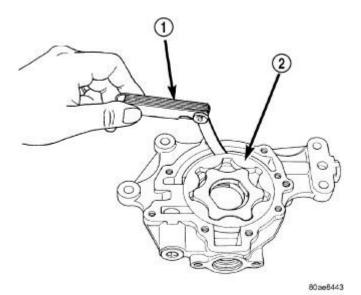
MEASURING OUTER ROTOR CLEARANCE IN HOUSING Courtesy of CHRYSLER LLC
